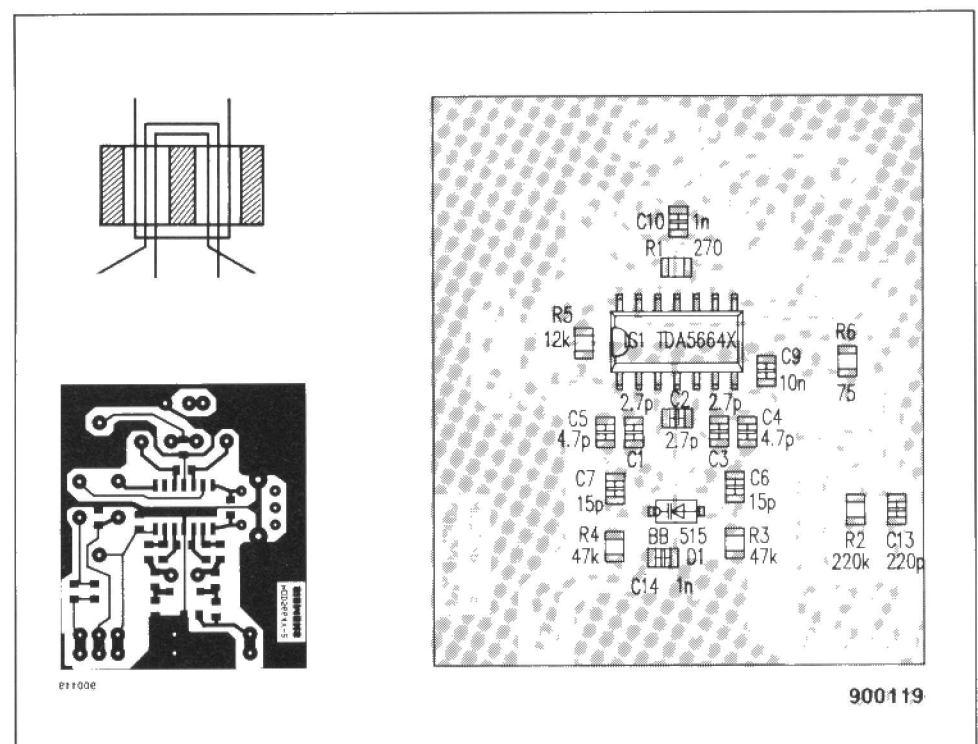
PCB track layout (1:1), component mounting plan (2:1) and balun construction.
